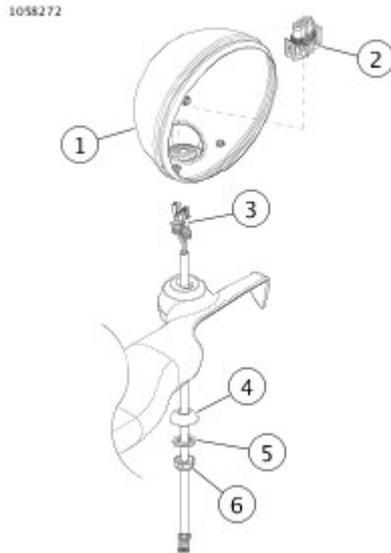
Auxiliary Lamp Housing with Incandescent Signal
